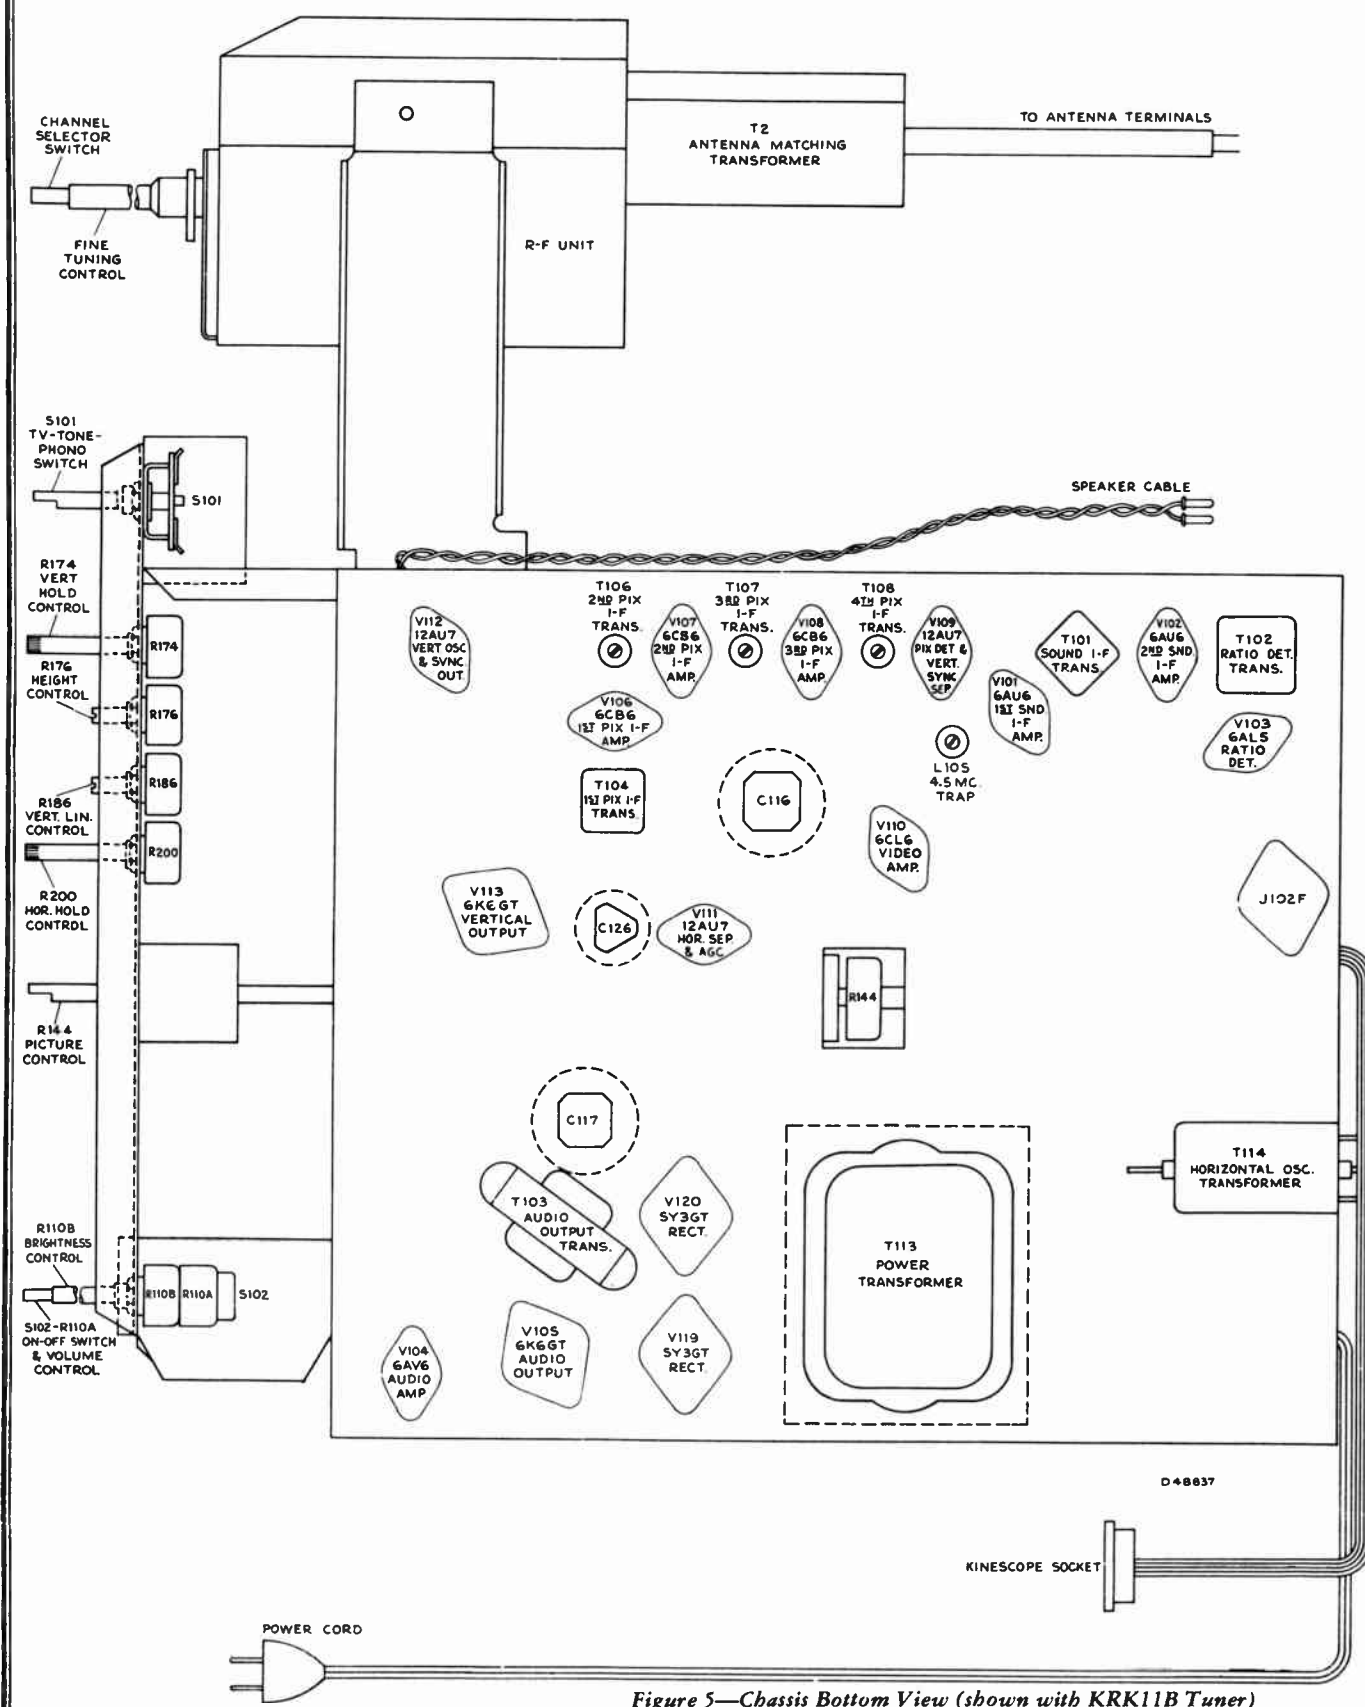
Chassis Bottom View (shown with KRK11B Tuner)
